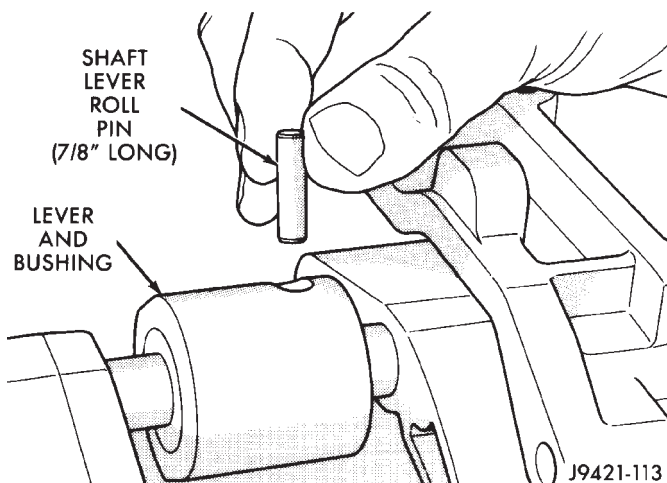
Starting Roll Pin In Shift Shaft Lever
